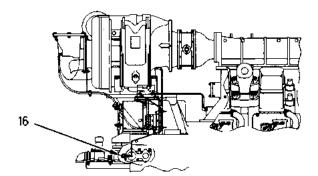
Engine Mounted Sensors Right Side View (16) Fuel temperature sensor.
